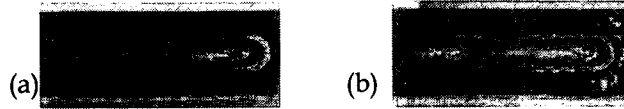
Weld output with spray mode (welding condition - arc voltage : 30V, wire feed speed : 5588mm/min, weld speed : 5mm/s): (a) stable (b)with defect(ϕ 10mm hole)
